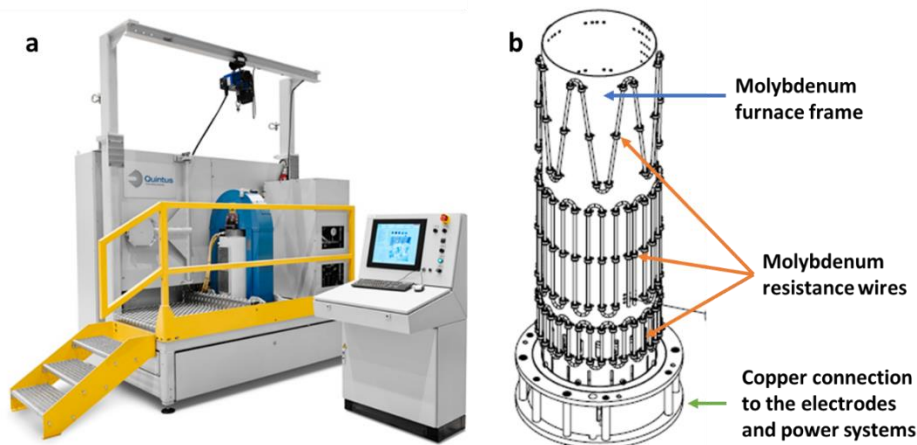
(a) HIP Quintus QIH 15 L machine and (b) Uniform Rapid Cooling module with Molybdenum furnace
